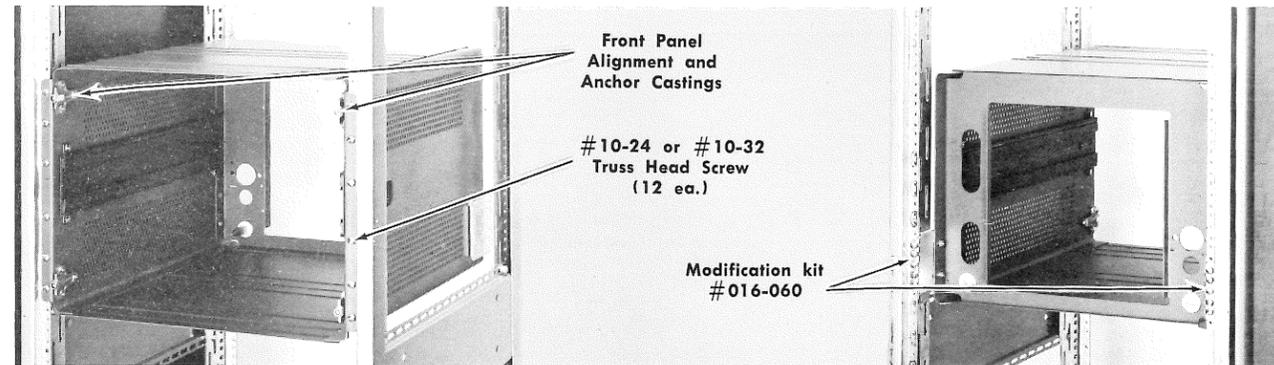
Front and rear views of the instrument cabinet mounting.
